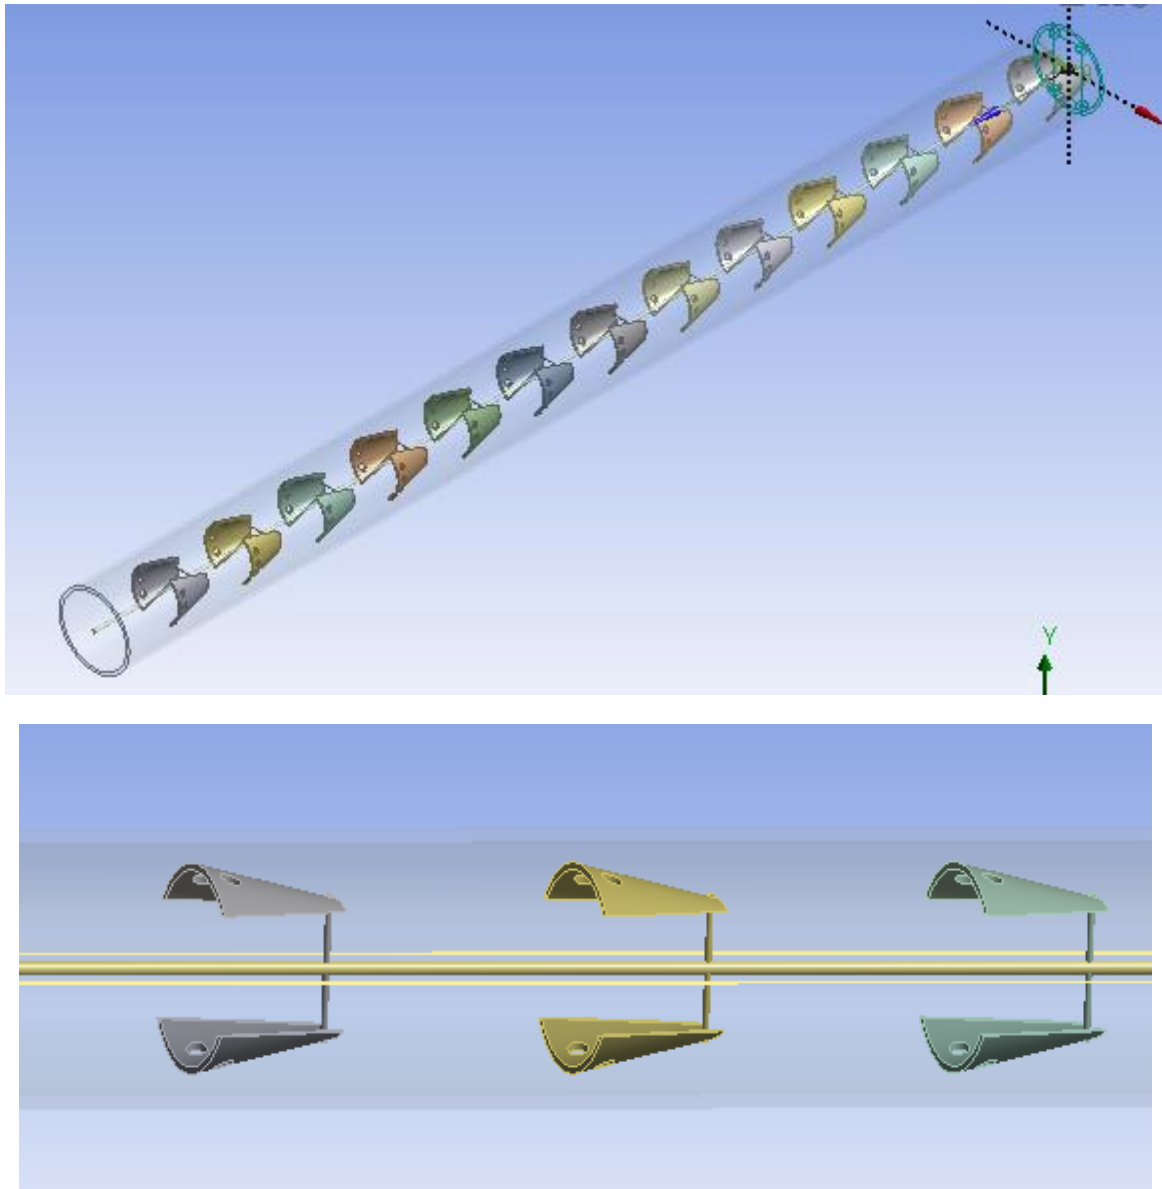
geometry of the smooth tube with perforated cutting cone inserts (PCC).
